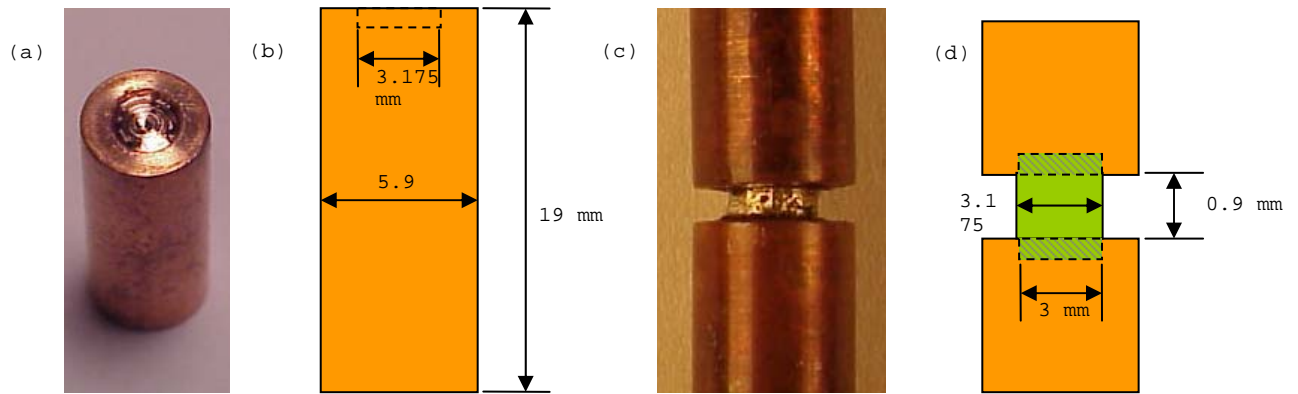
(a) Picture and (b) schematic of Cu rod used in cylinder-type joints. (c) and (d) show the assembled cylinder-type joint.
